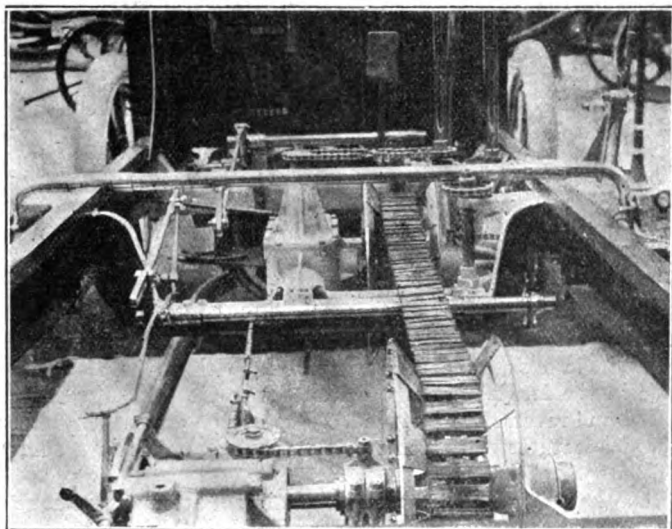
The Chassis of the Fouillaron Car, showing Expanding Pulleys.
